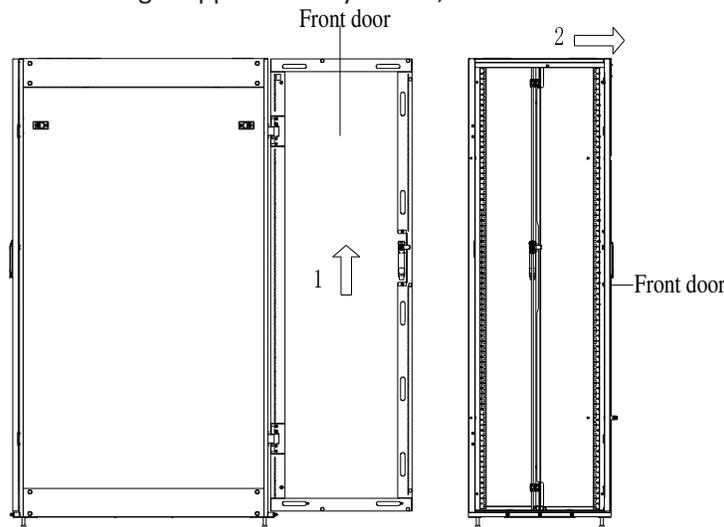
Remove the Front Door Schematic (Front Door Open)
